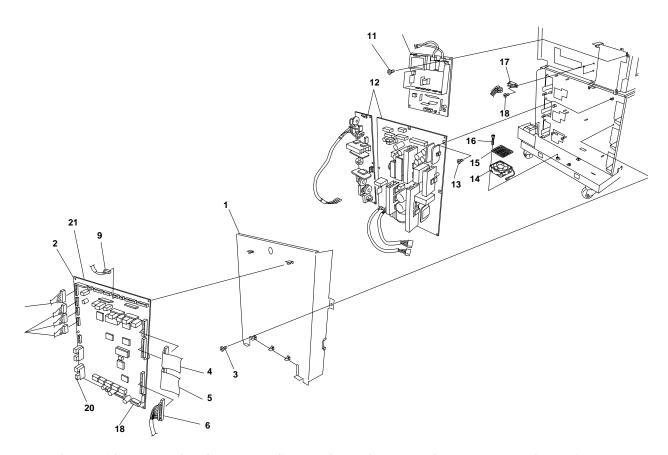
Mechanism Controller PCB, HVPS, LVPS, and LVPS Fan Parts Locational Diagram
